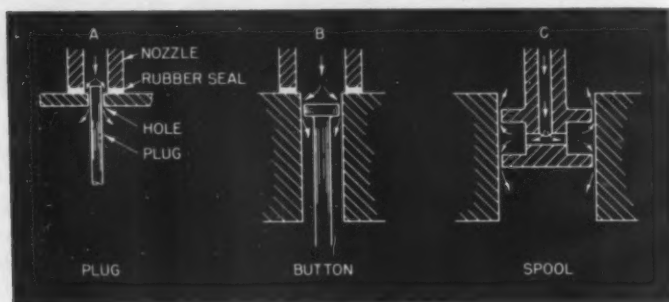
To reduce excessive air flow, gage can be provided with a cylindrical plug (A), a button-head plug (B), or a spool (C).
